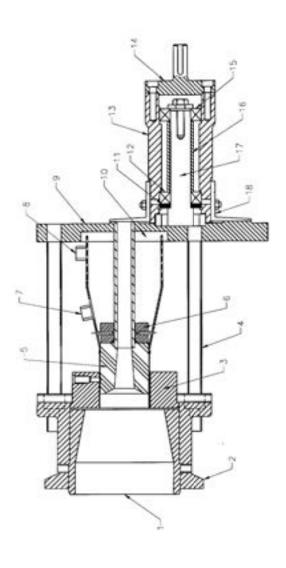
Assembly of TSP & TVP Cutting Arrangement
